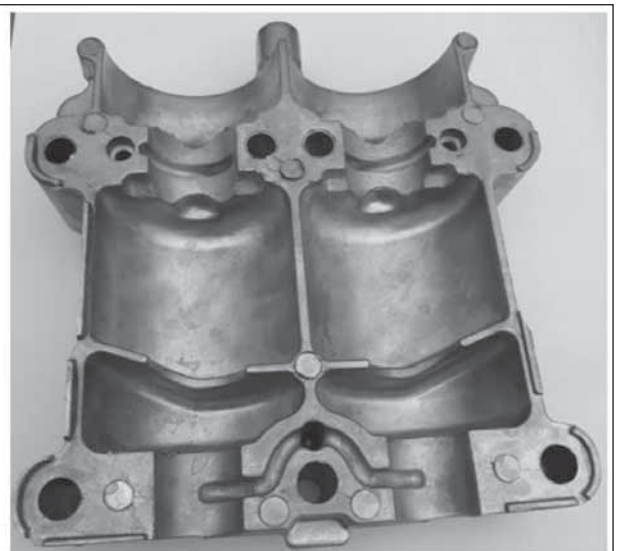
Castings made in the PVD coated die after 100,000 shots have been produced^[6]
